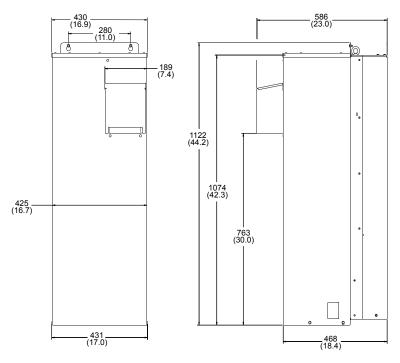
Exterior dimensions for D2h with NEMA 3R Kit (9K716)
